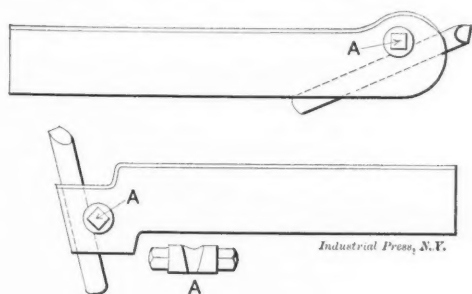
German Lathe and Planer Tool with Inserted Cutters.
